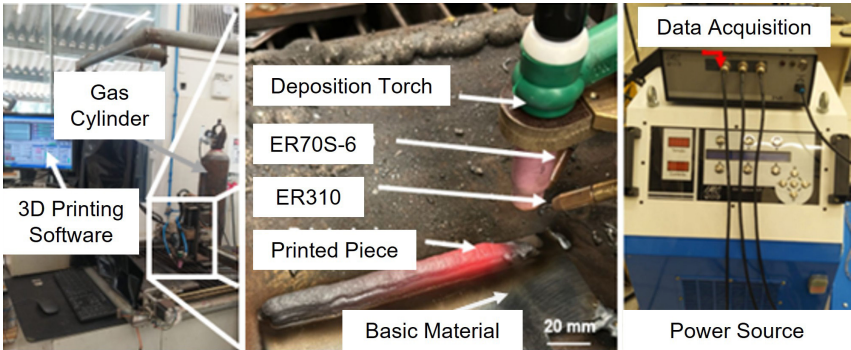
Wire arc additive manufacturing equipment based on the gas tungsten arc welding process, highlighting the non-consumable electrode torch, the material feeding system, and the layer-by-layer deposition control employed in the fabrication of metallic structures.
